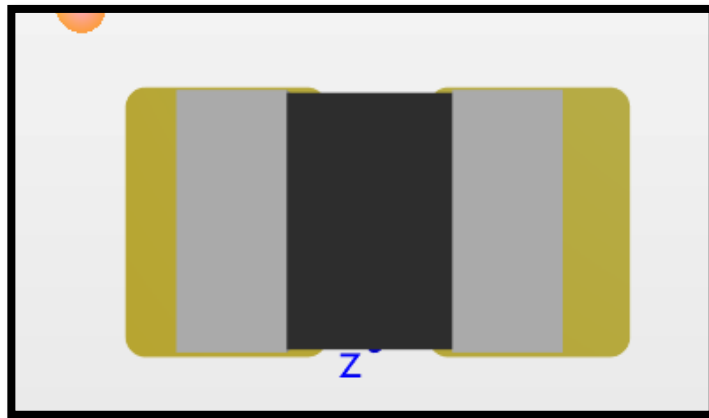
The 3D View of the 0402 Package Resistors in the Library
